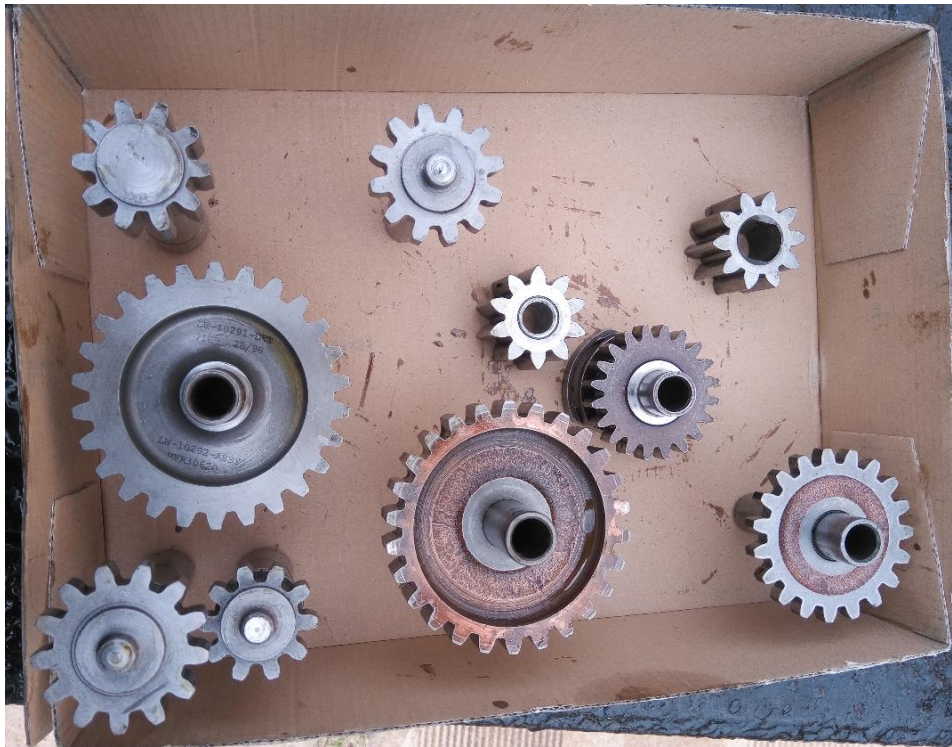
The serviceable gears from the ZS-CKM aircraft.
